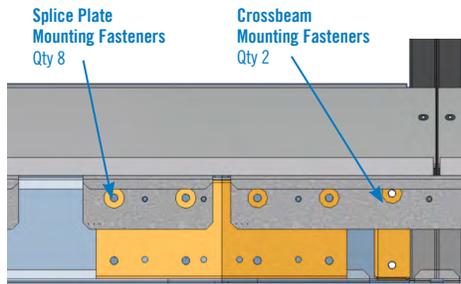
Inside beam splice plate and crossbeam mounting fastener locations
